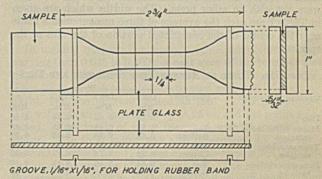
Specimen Holder of Glass Plates Held Together with Rubber Bands
